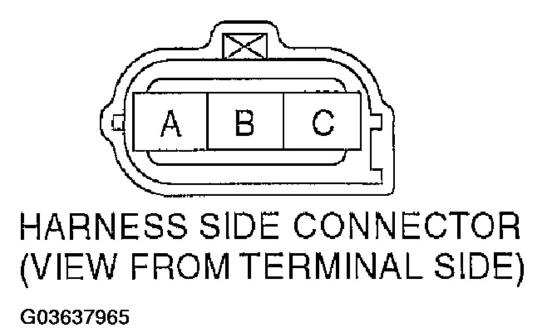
Identifying TP Sensor Harness Side Connector Courtesy of MAZDA MOTORS CORP.
